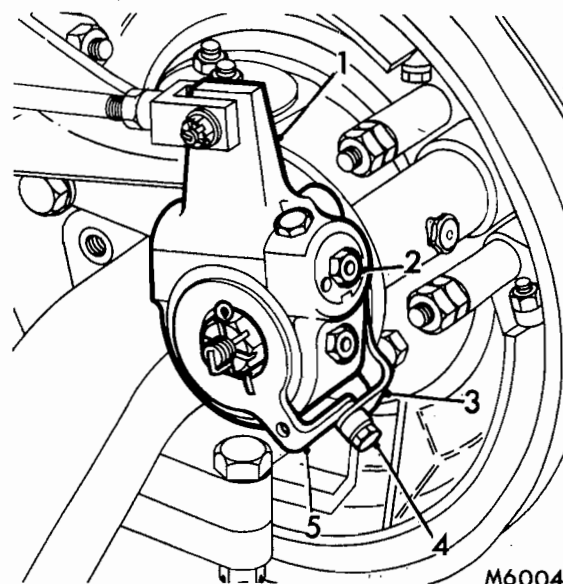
VIEW OF FRONT SLACK ADJUSTER
